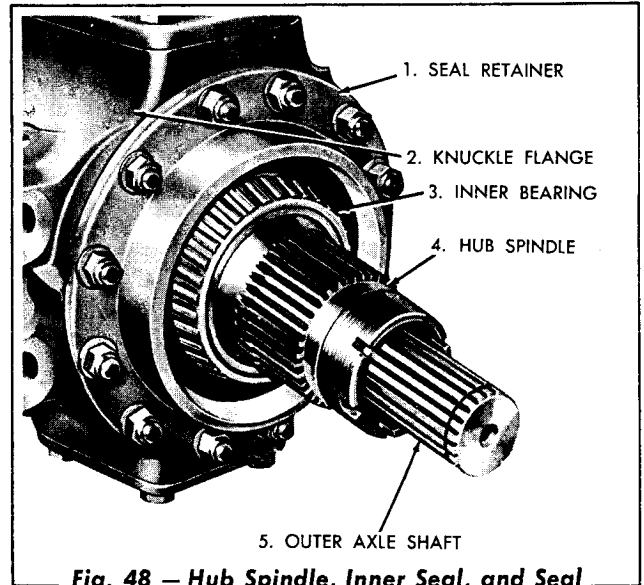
Hub Spindle, Inner Seal, and Seal Retainer (Steering Axle)
